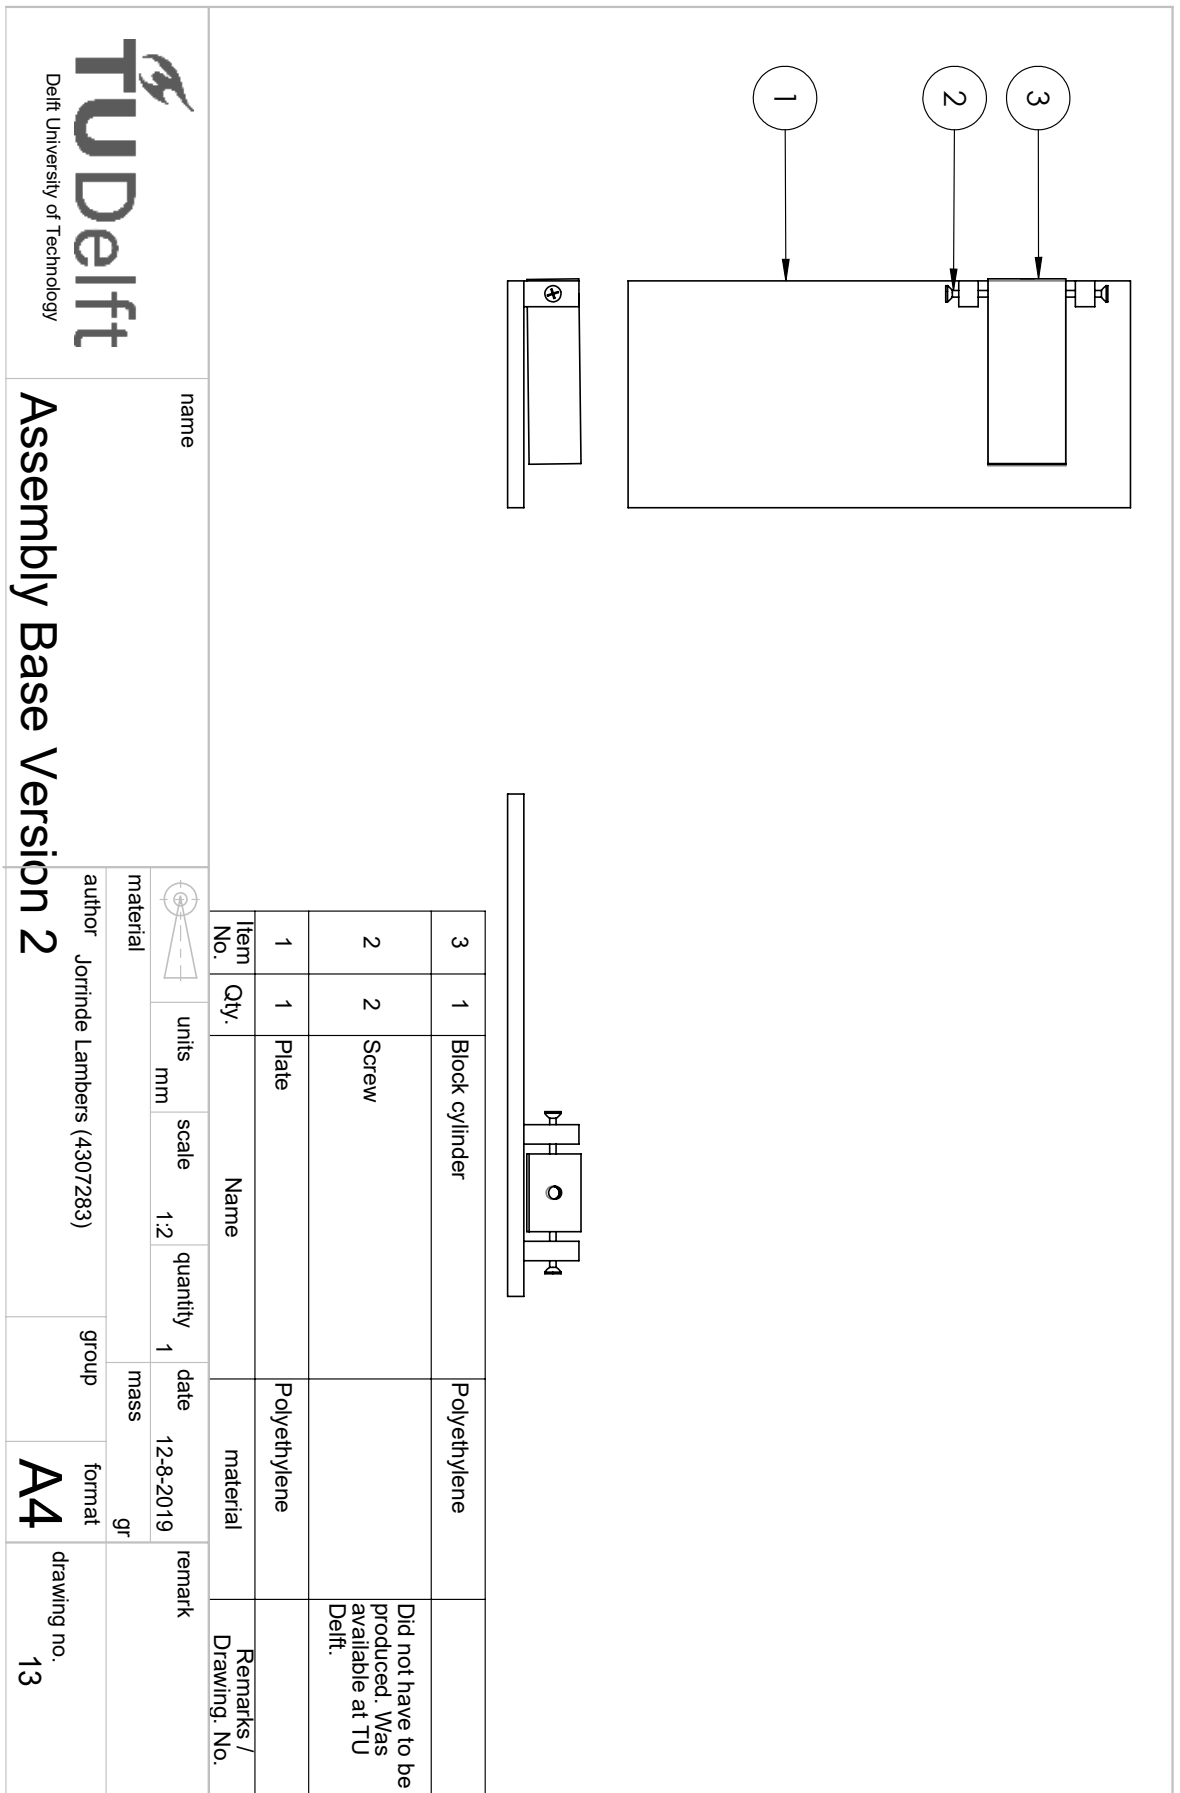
SolidWorks drawing of the assembly of base version 2 (plate + block).
